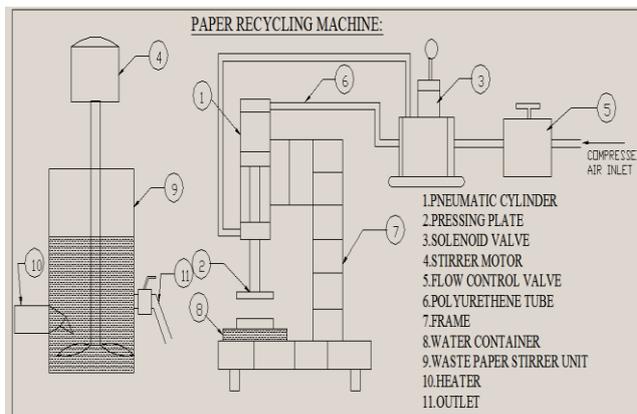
2D- Drawing of Paper Recycling Machine Fig: 15. Isometric Drawing with Front, Top & Side views
